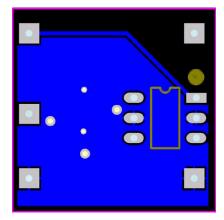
Bottom, PCB Layout for SC-70-6 (board size: 1" x 1")
